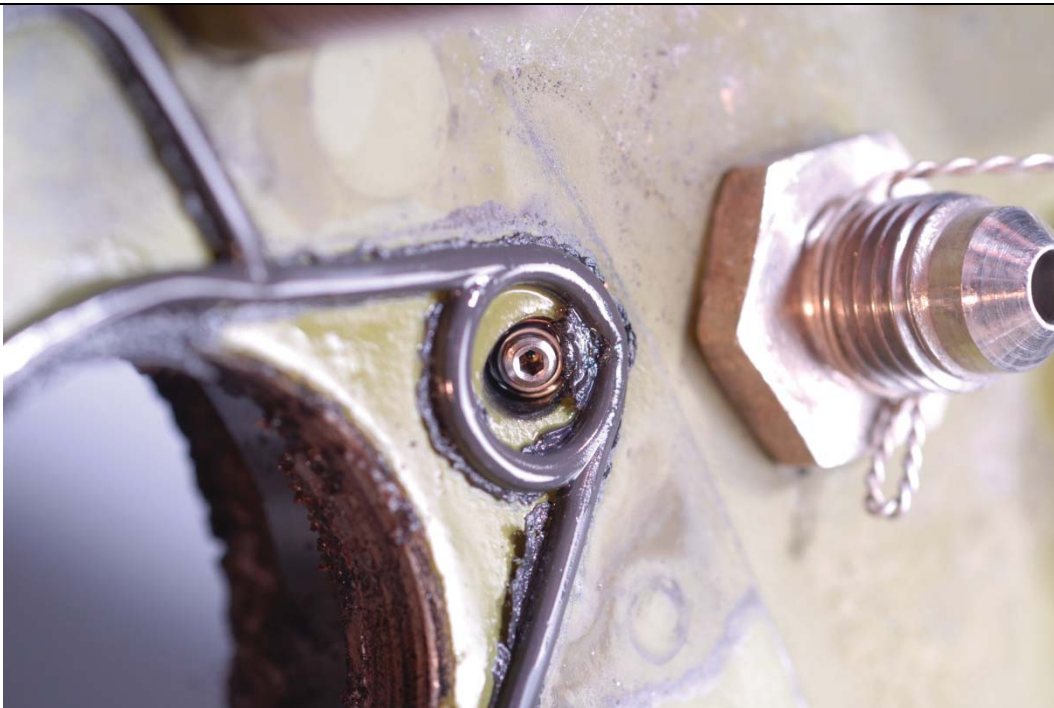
P-79001C, Oil Screen (Torque Sensor)
